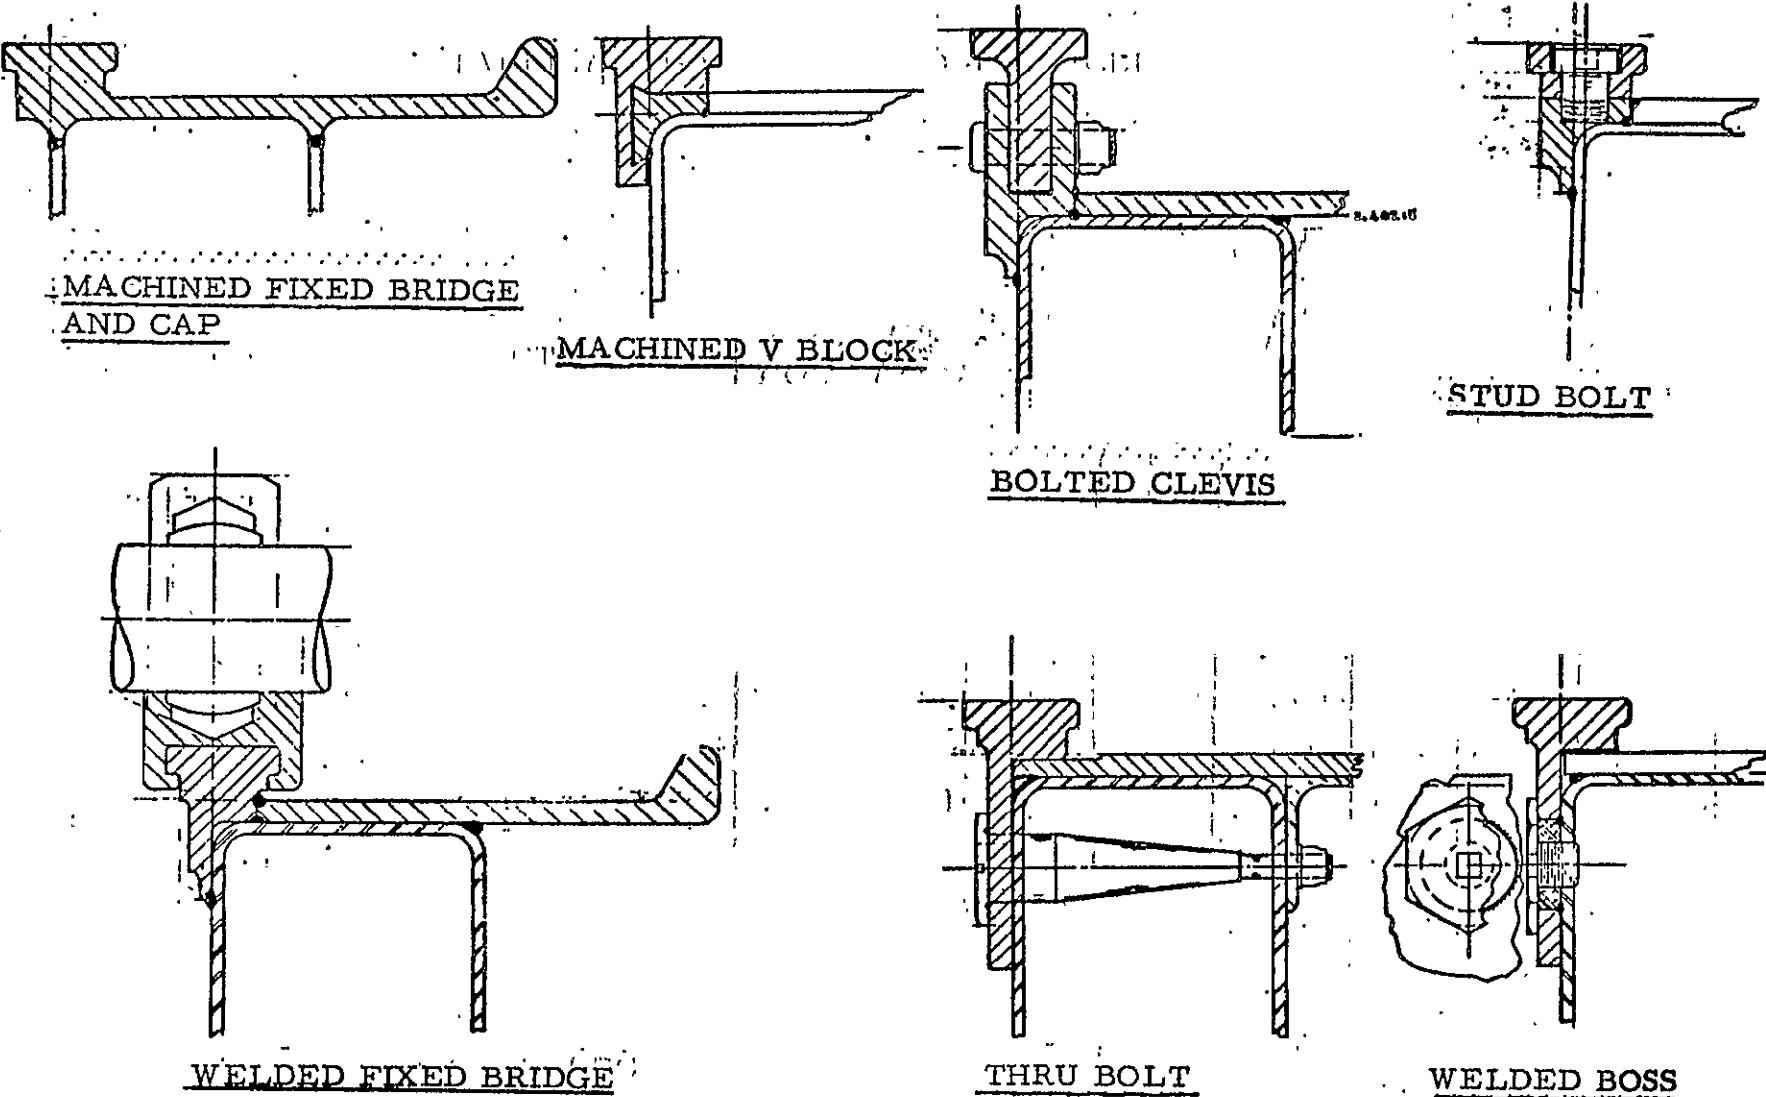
PAYLOAD LONGERON BRIDGE CONCEPTS
